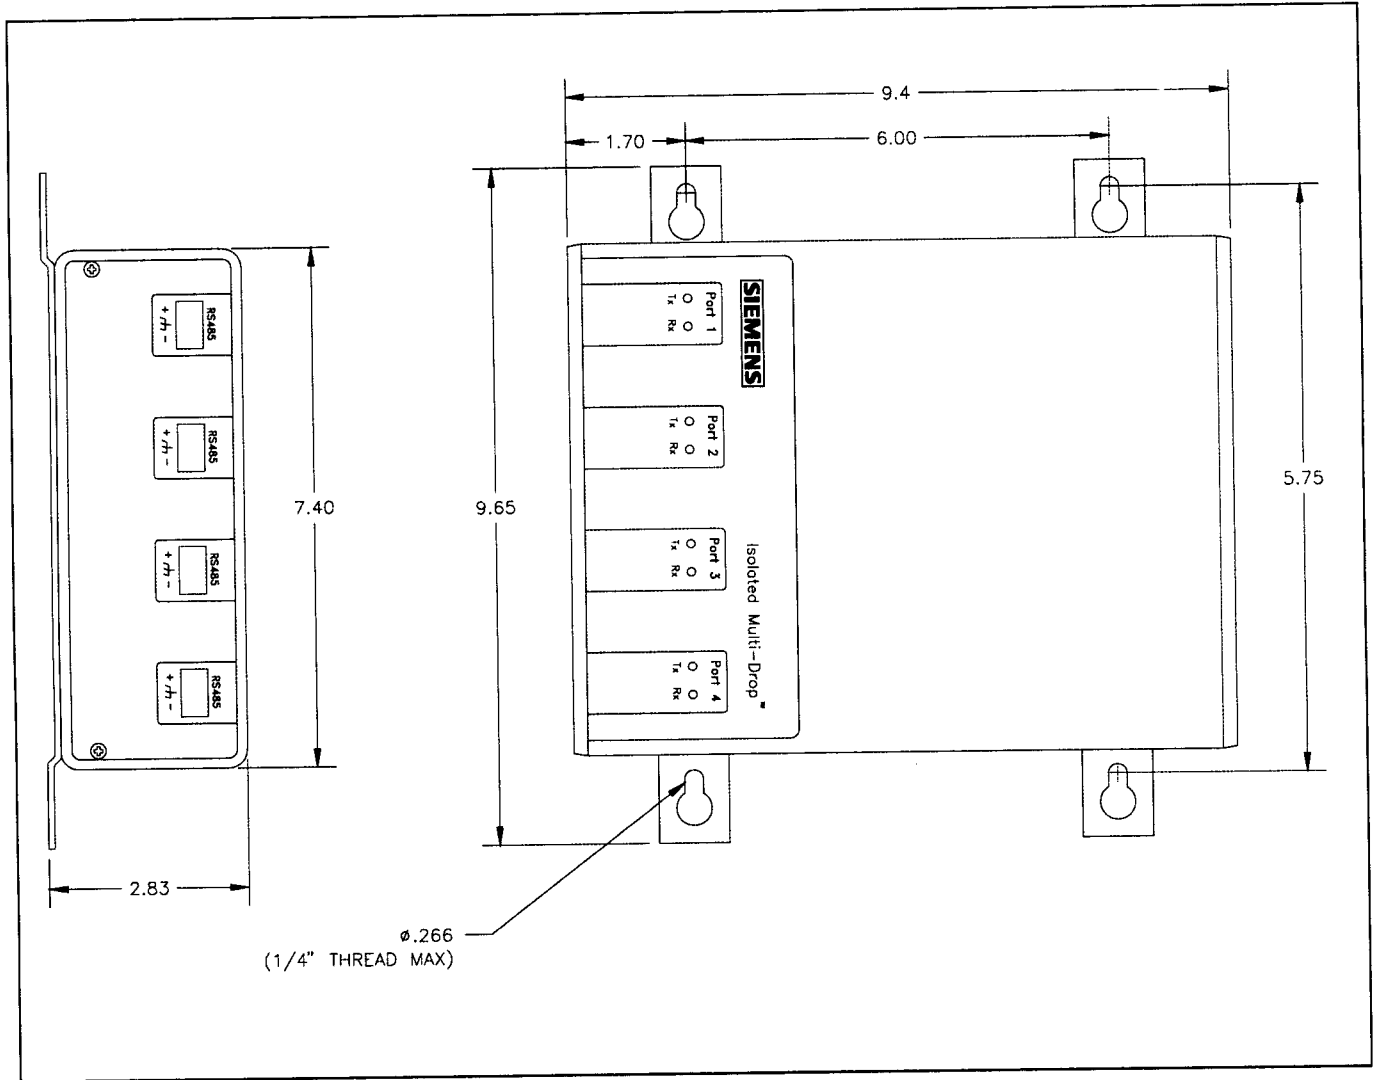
Mounting Dimensions for the Isolated Multi-Drop Converter
